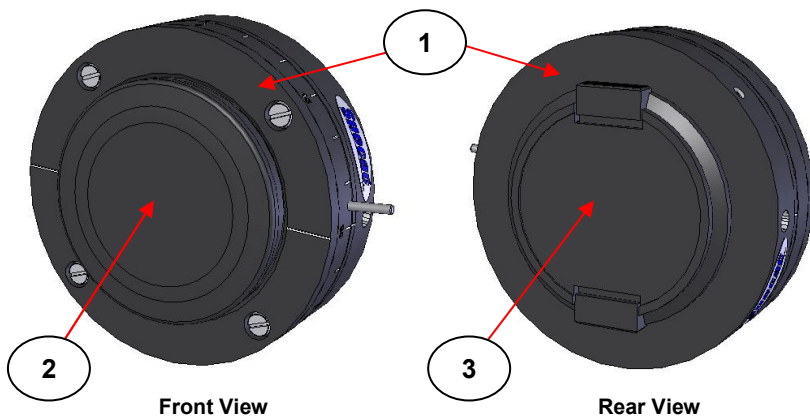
Front and Rear Views of Benchmark™ Rotator Mount P/N GS12510
